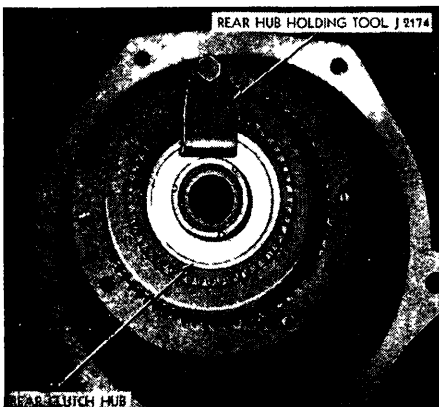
Install rear hub retaining t l t rear unit drum using a r reverse drive flange attaching b lt. Th n remove c nt r bearing cap
